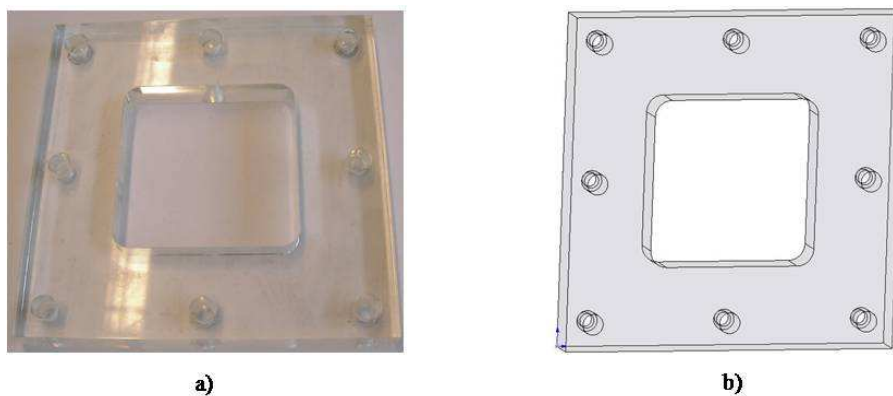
Cathode end plate (acrylic) (a) photograph, (b) 3D CAD drawing.
